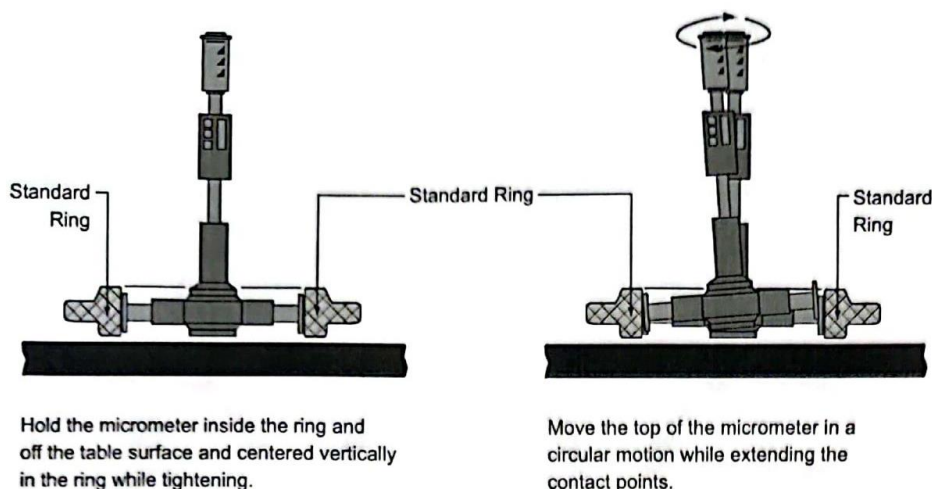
Techniques for Using the Three-Point Bore Gauge with the Calibrated Master Ring
